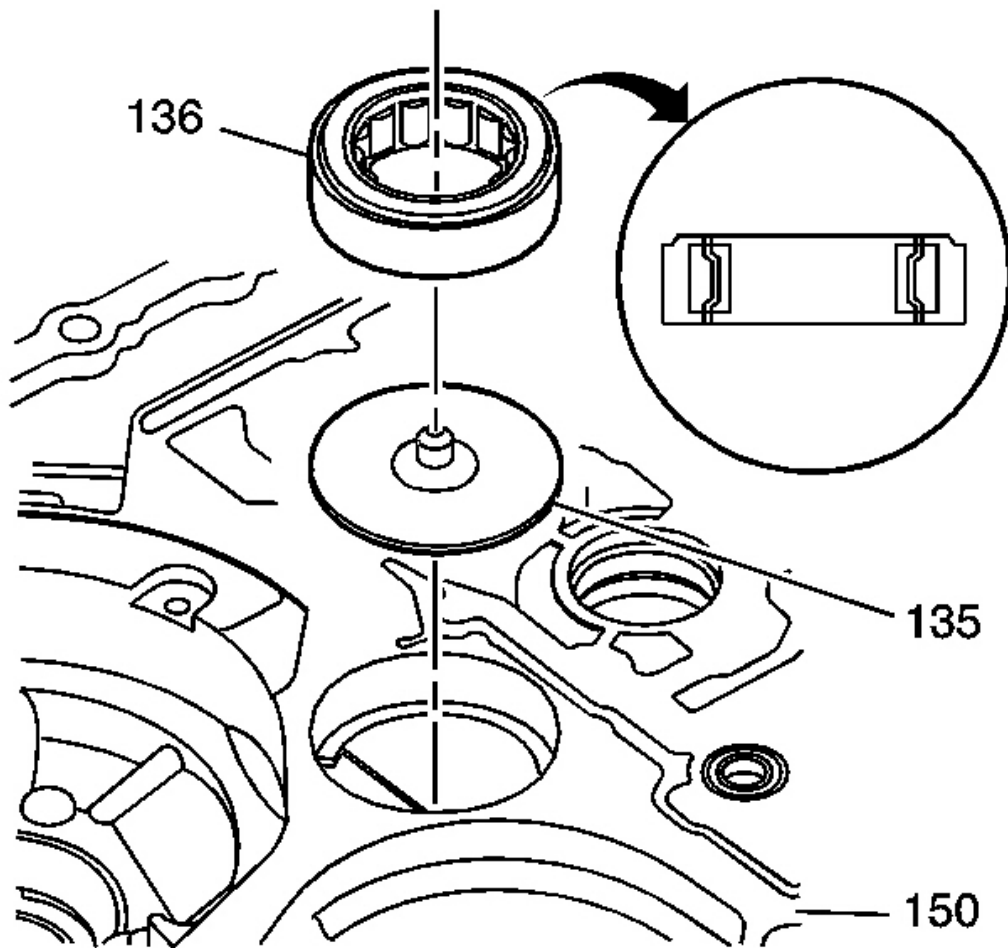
Output Shaft Lube Feed Plate & Output Shaft Front Bearing
